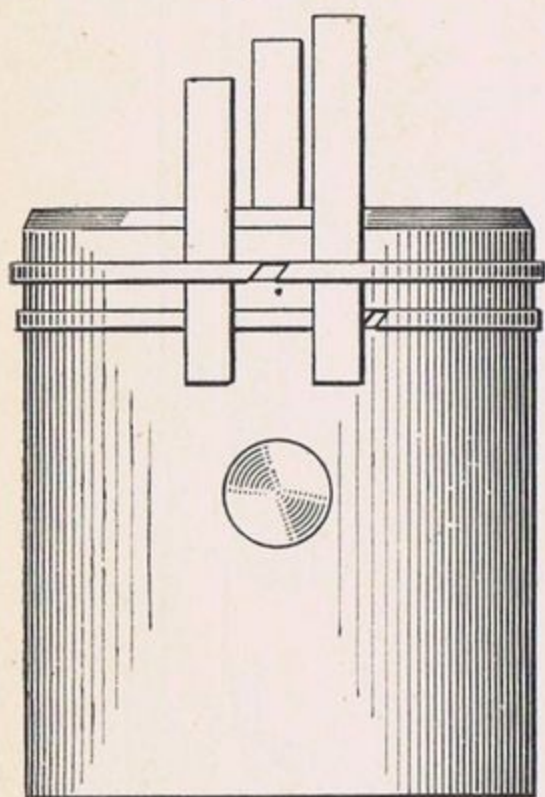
METHOD OF REMOVING PISTON RINGS
